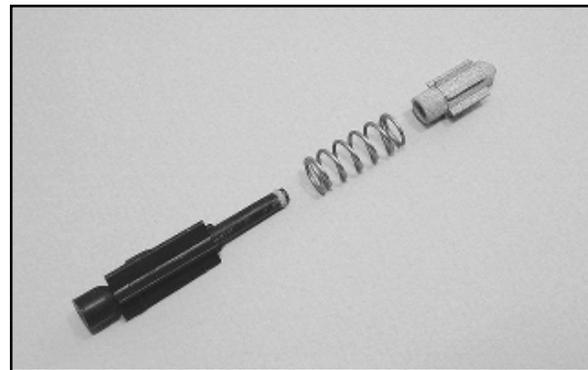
Plastic adjustment screw (early version) and metal adjustment screw (current version)
